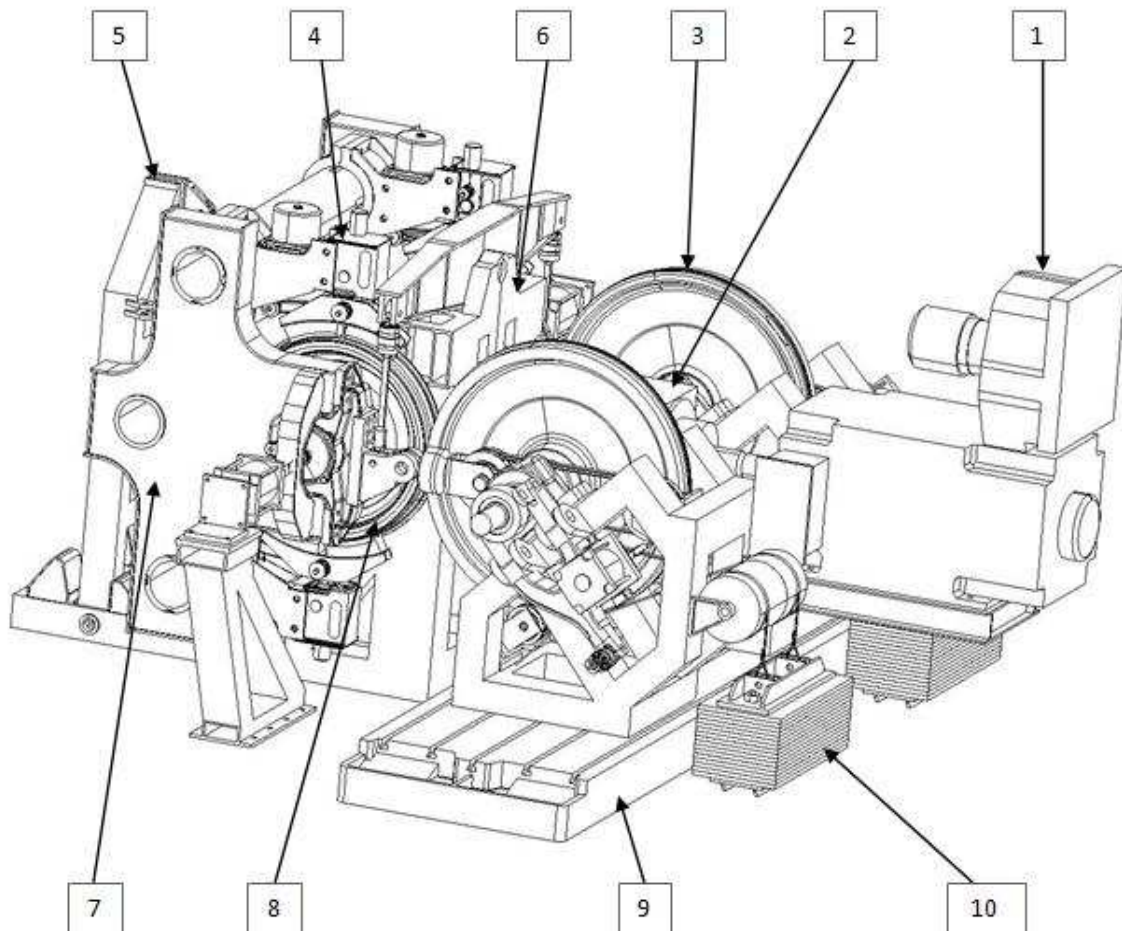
Scheme of the brake test bench RAILBCOT (1 – electromotor, 2 – gearbox, 3 – rotating rail 4 – brake unit, 5 – rear hinge, 6 – front hinge, 7 – supporting frame, 8 – wheelset, 9 – base, 10 – weight unit)
